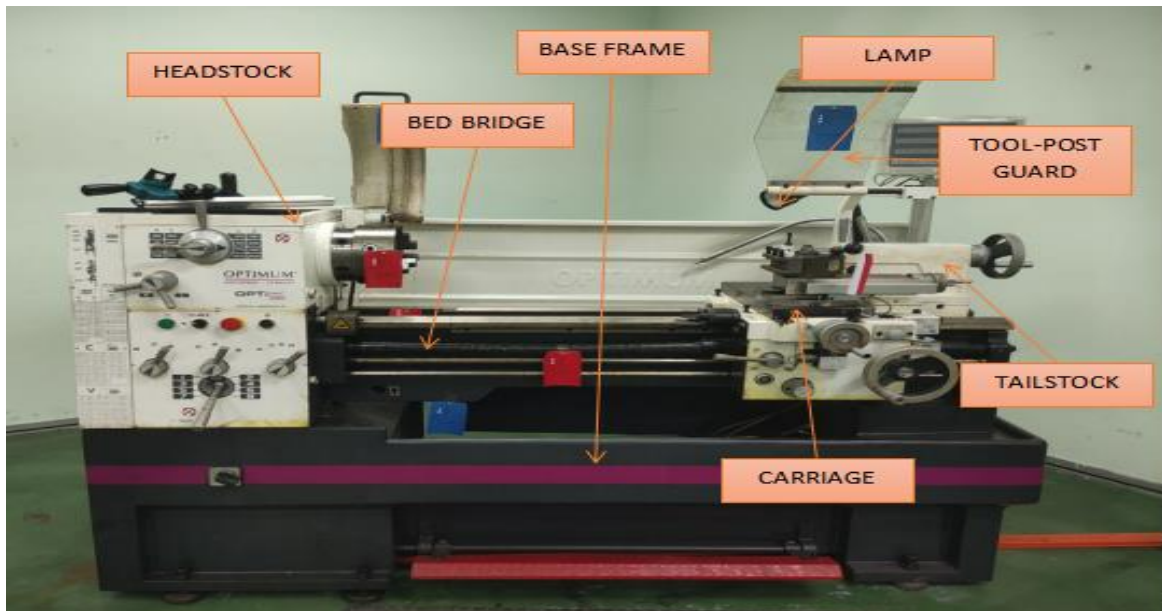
Front View of The Lathe Machine (Model: Optimum D=420)
